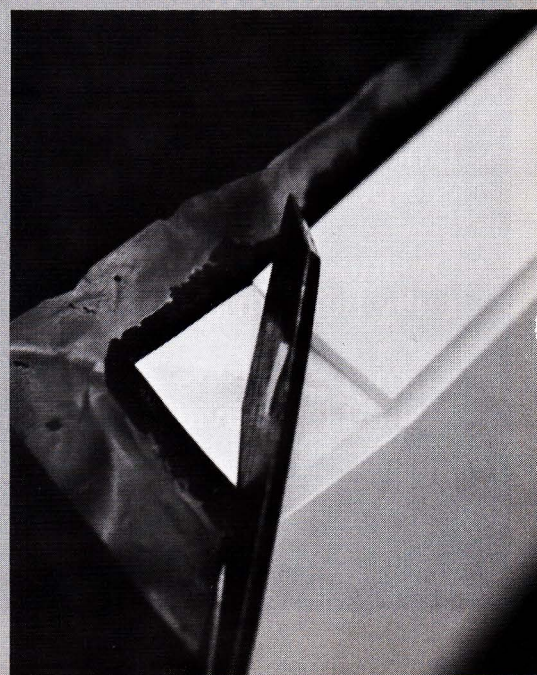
Bulk may be trimmed from the corners prior to the final assembly for the 45° turnback corner.
